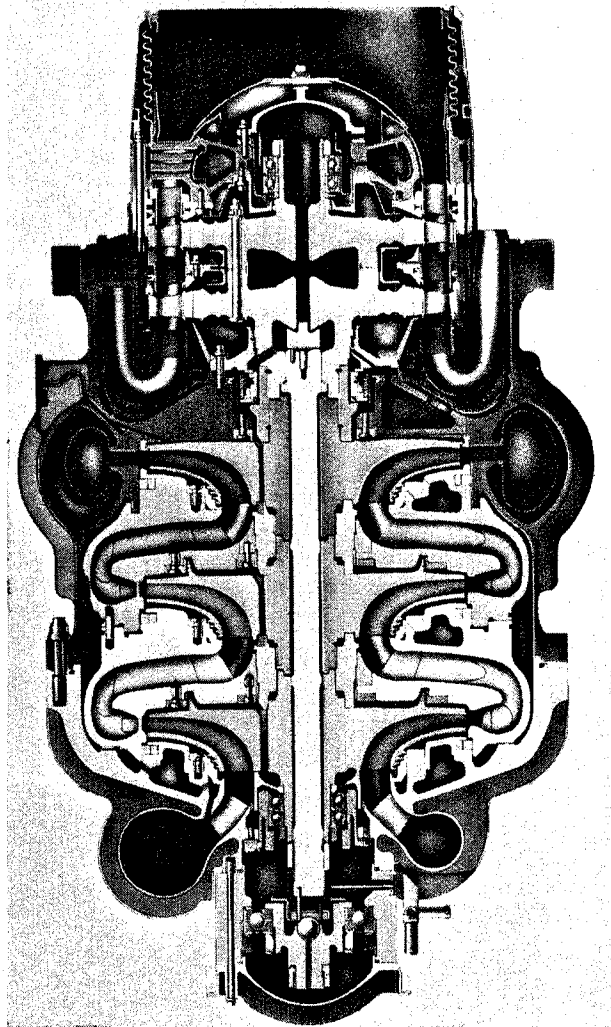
SSME LPFTP 82402 DISASSEMBLY REVIEW
